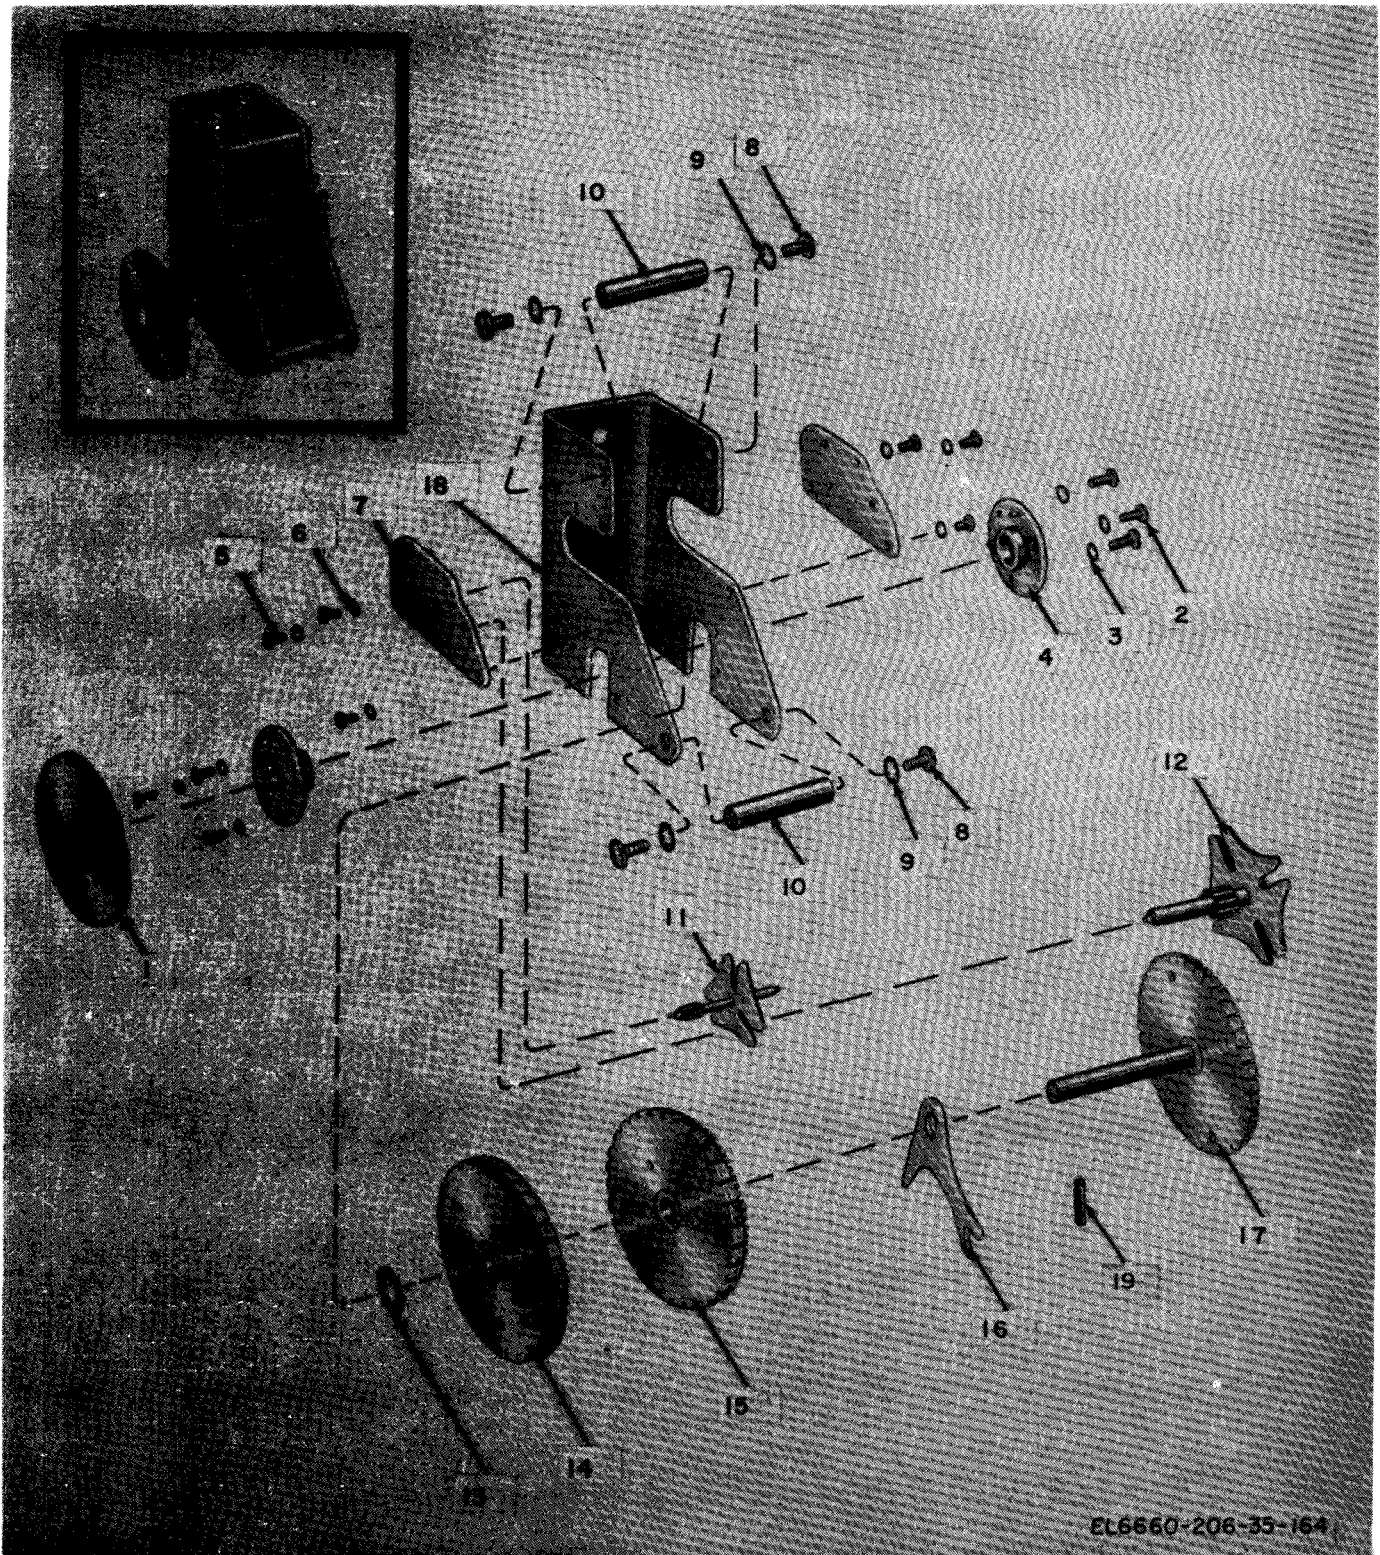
Elevation print unit equipped with Geneva movement, exploded view.
